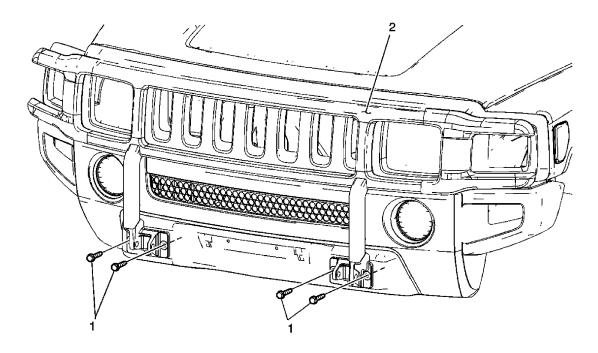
Grille Guard/Brush Guard Replacement Courtesy of GENERAL MOTORS CORP.
